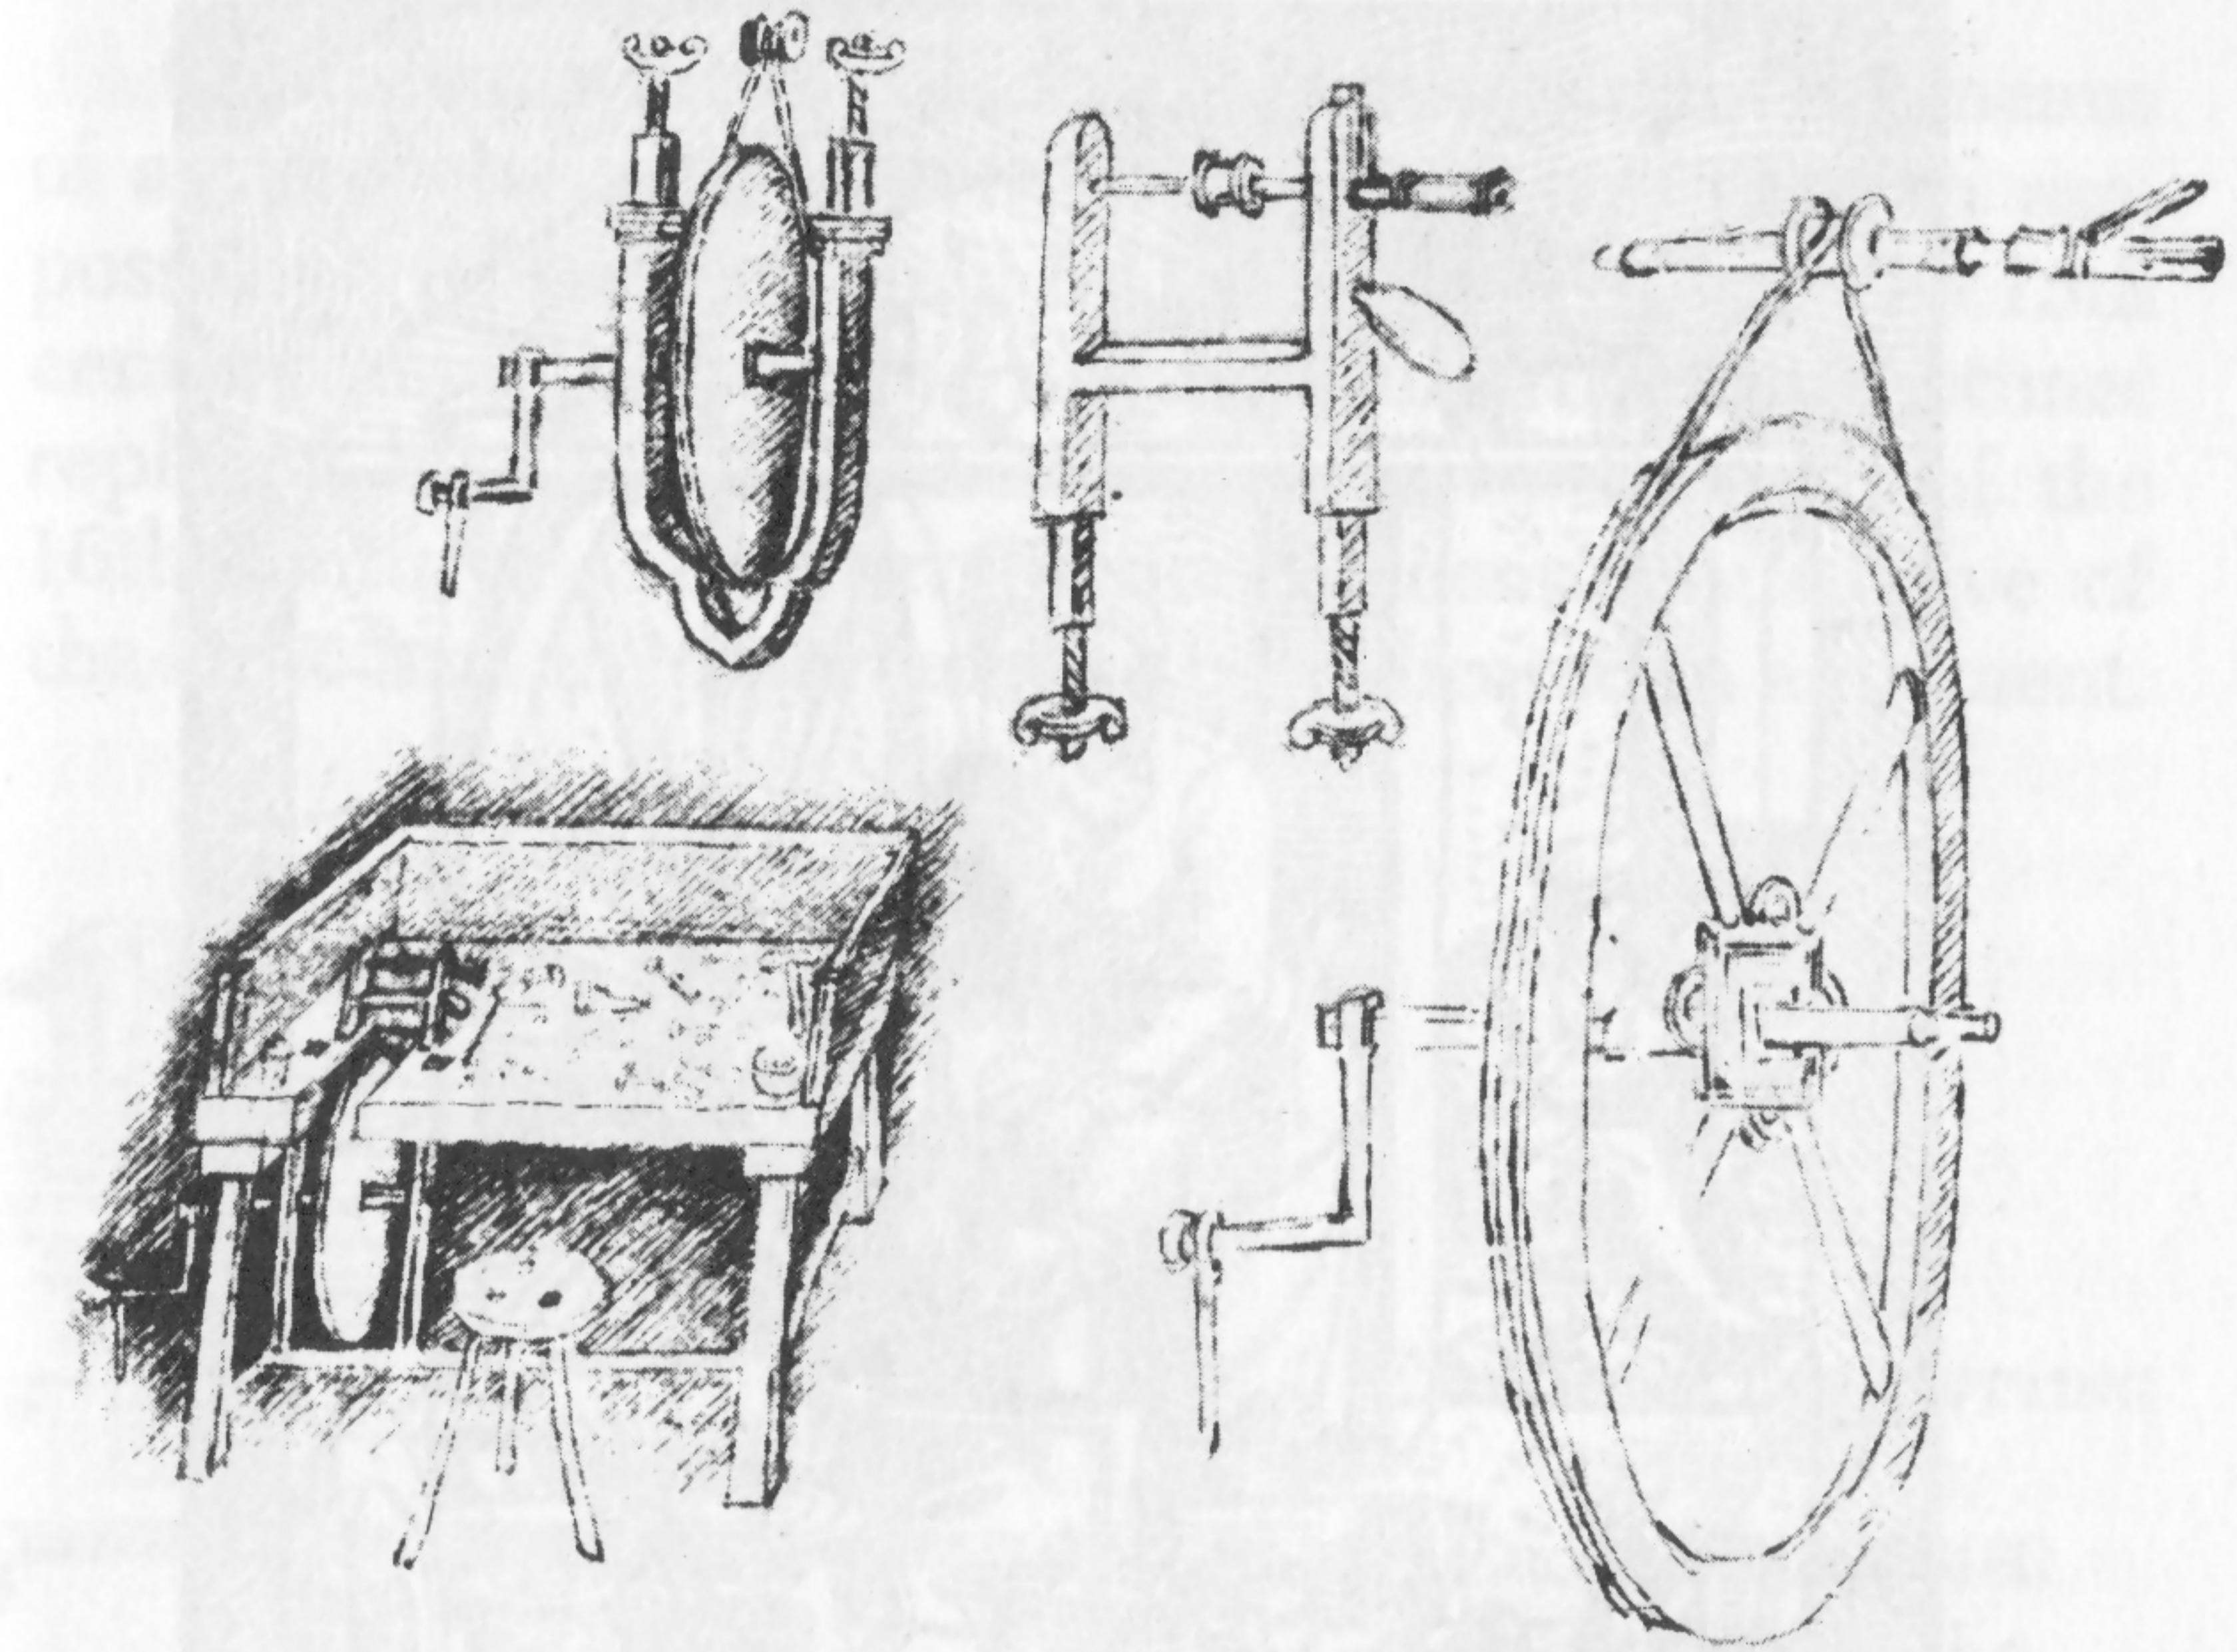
CRANKED WHEEL AND CORD DRIVE
